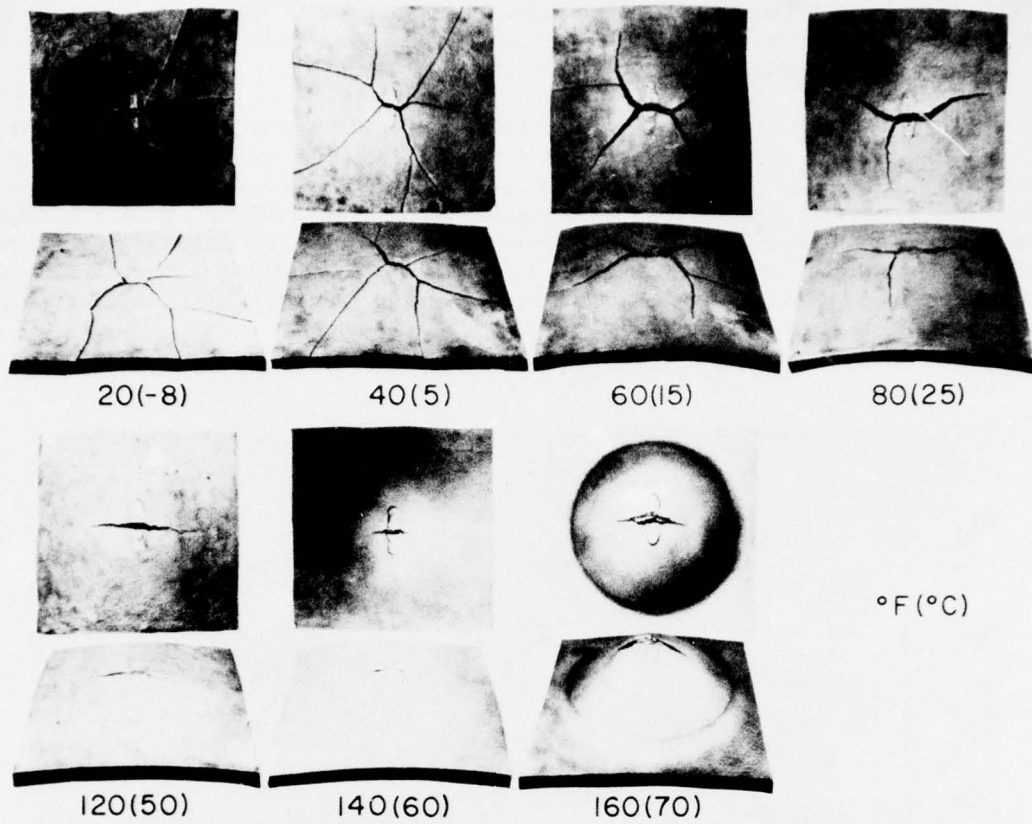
Features of explosion crack starter tests of ship plate steels. The steel is representative of the best quality.
